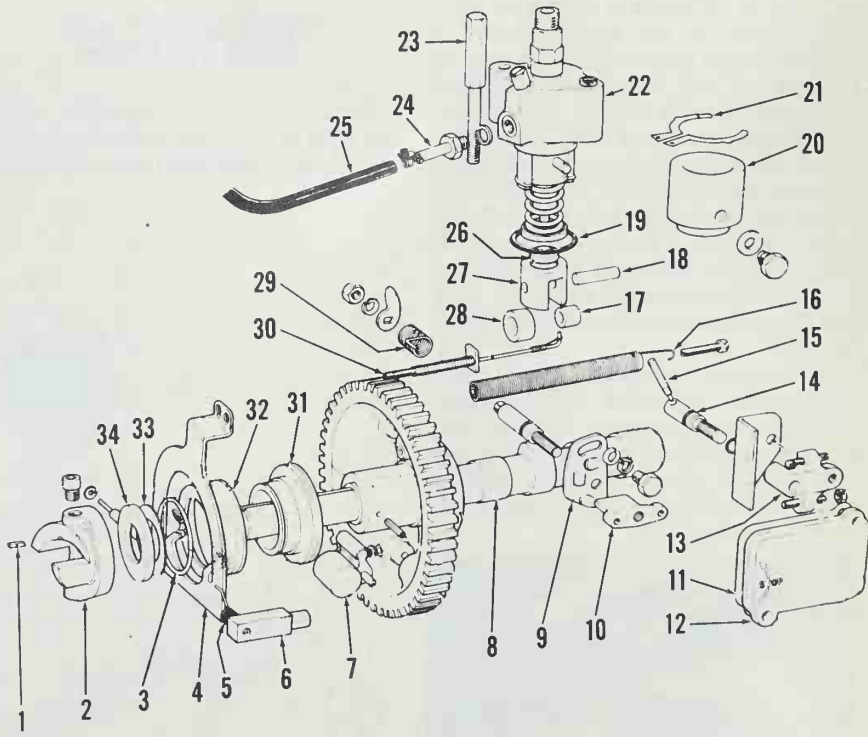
Exploded view of camshaft, fuel pump and governor assemblies.
